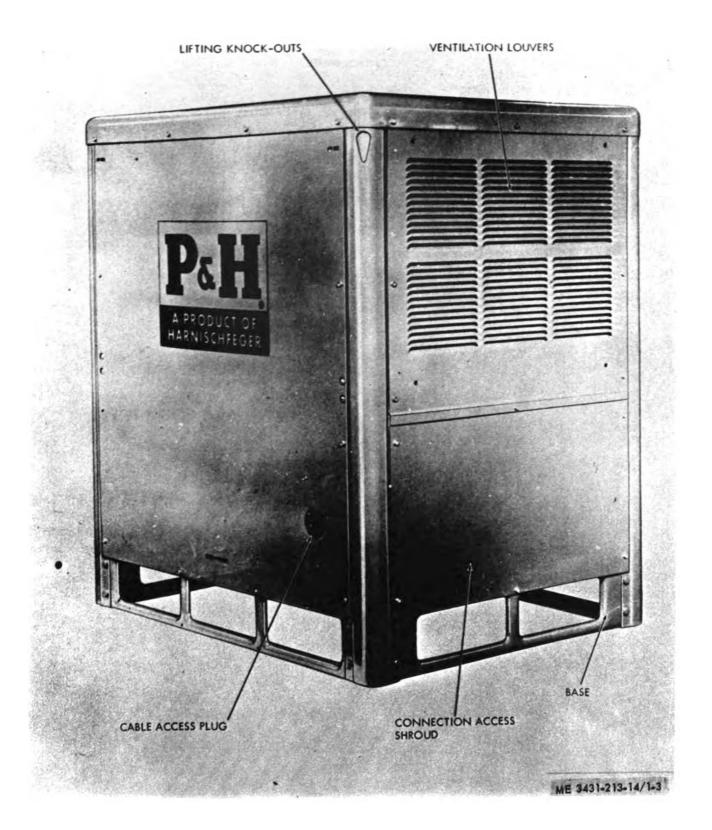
Arc welding machine, left rear, three-quarter view.
